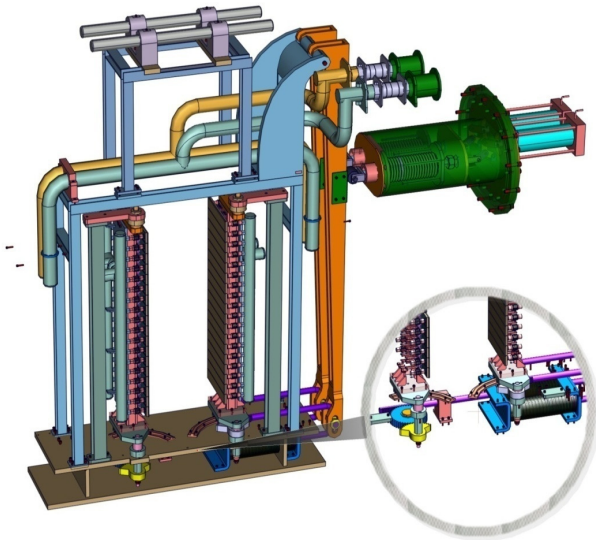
Calorimeter with CMM & Actuator feed through assembly
